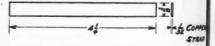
Example of work for which the die shown in Fig. 5 is used.
